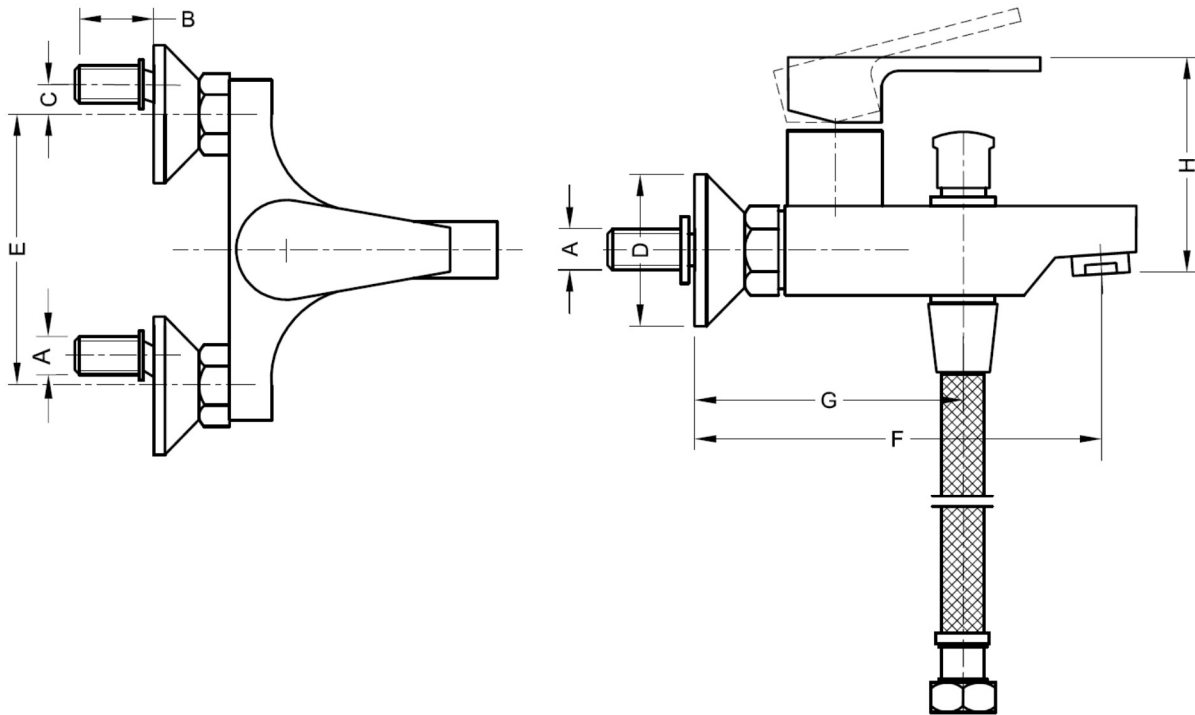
TYPICAL DETAILS OF BODY FOR SINGLE LEVER WALL MOUNTED SINK MIXER WITH SWIVEL SPOUT
